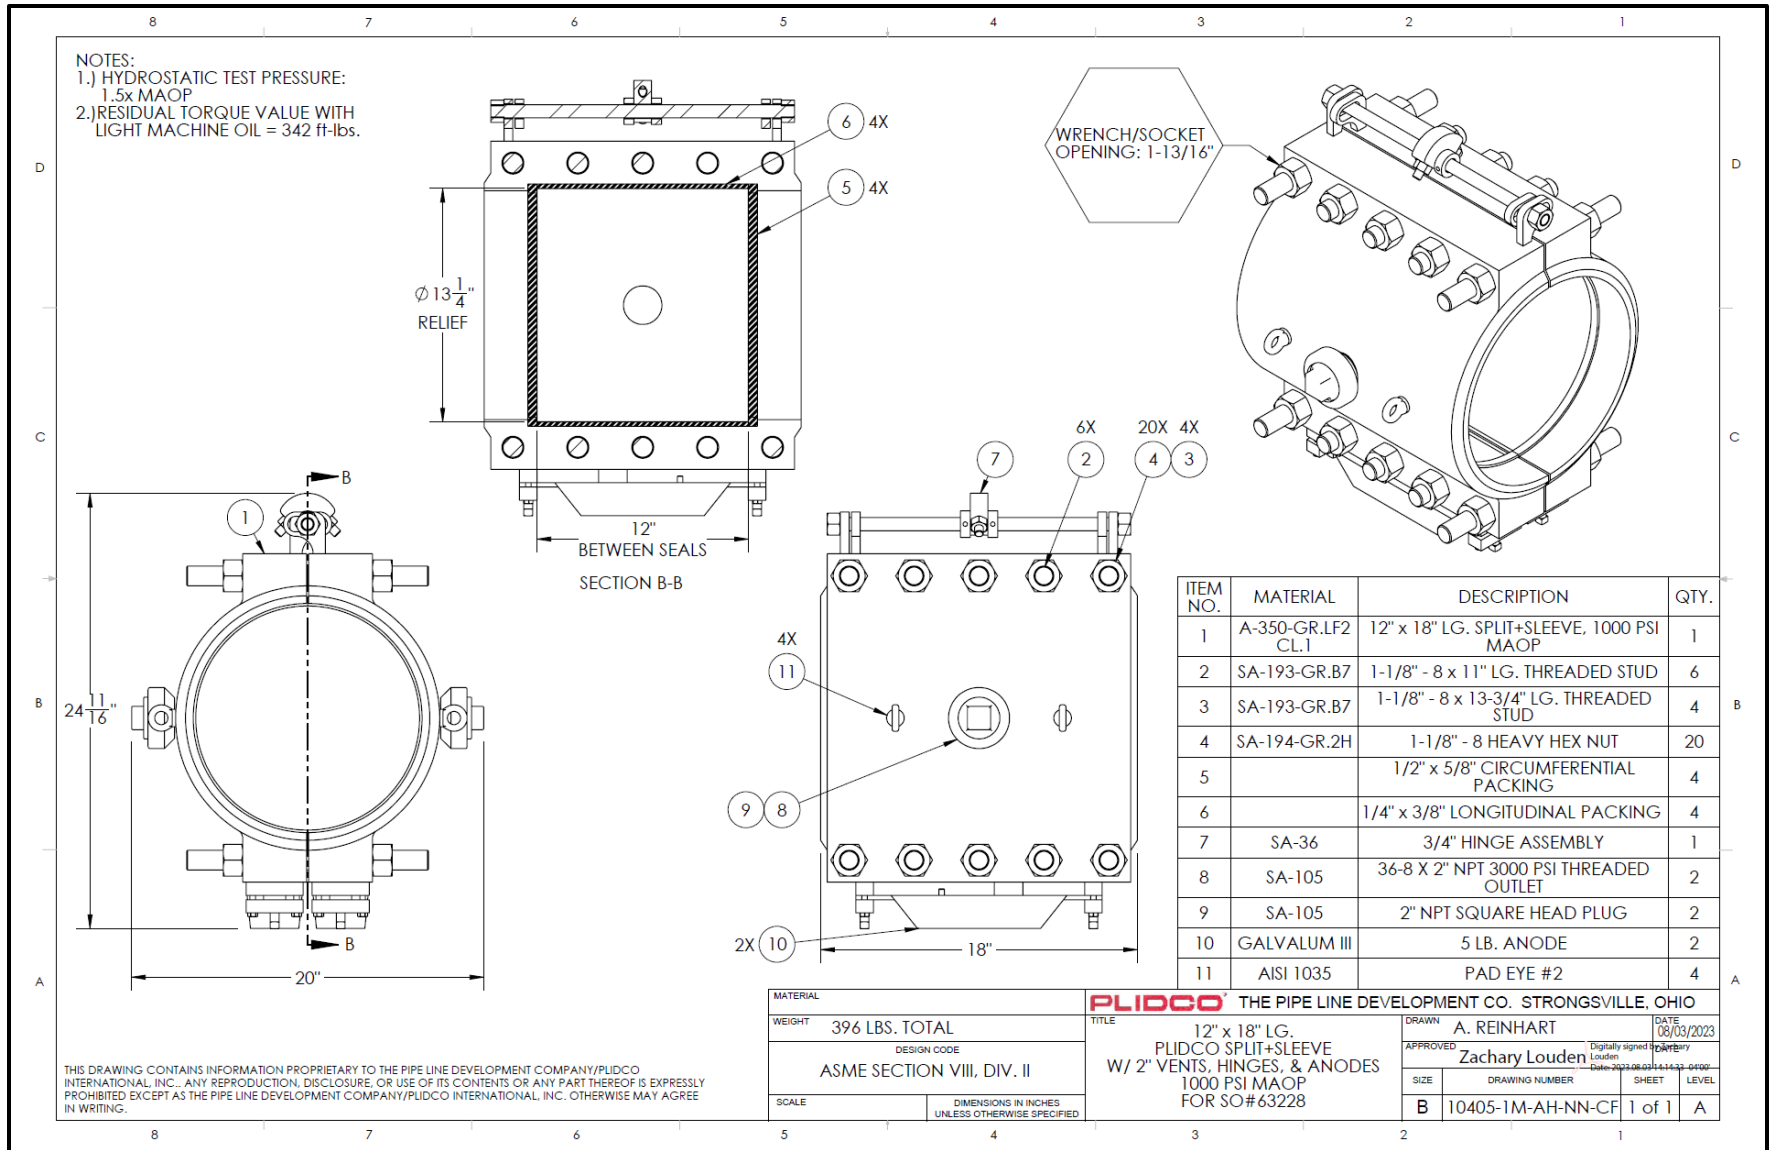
External Repair Clamp Engineer Drawing and Specifications
